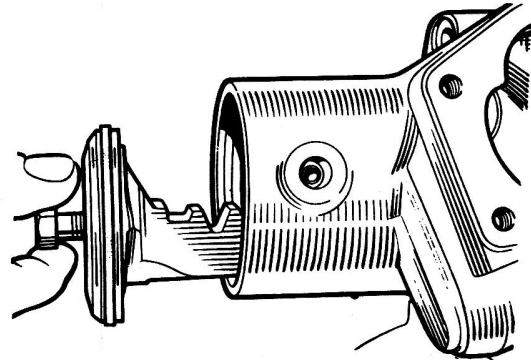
Using a bolt to withdraw the piston and rack assembly
